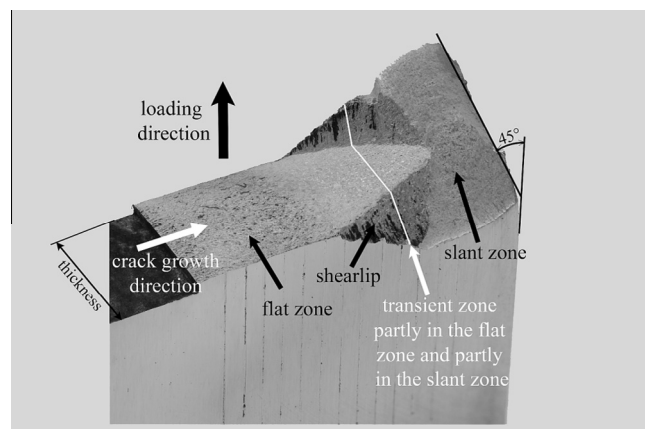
Flat, slant and transient zones on the fracture surface.
